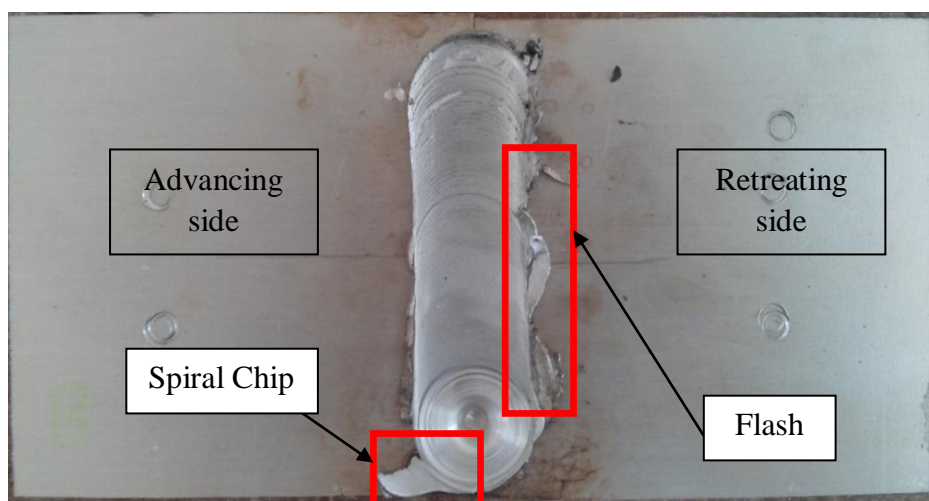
3: The presence of spiral chip and flash on Pass B welded plate.
